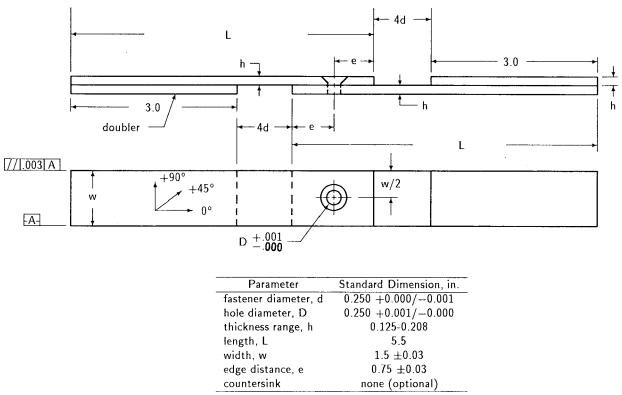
Single-Shear Test Specimen Drawing (inch-pound) (See Fig. 7 for details of double-fastener version.)
